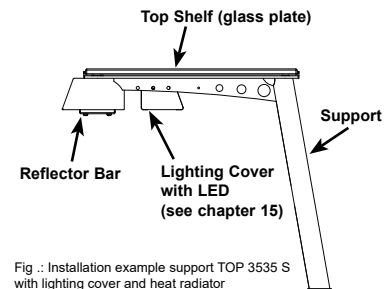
Installation example support TOP 3535 S with lighting cover and heat radiator
